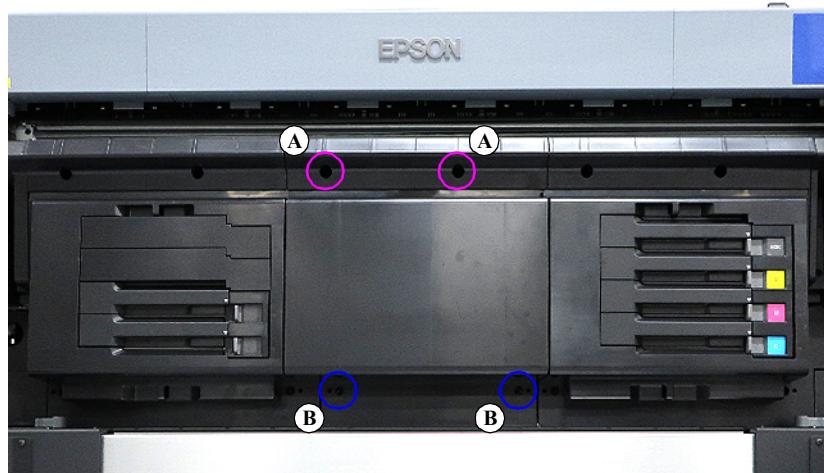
Removing the PAPER GUIDE MIDDLE / FRONT LOWER COVER (1)
